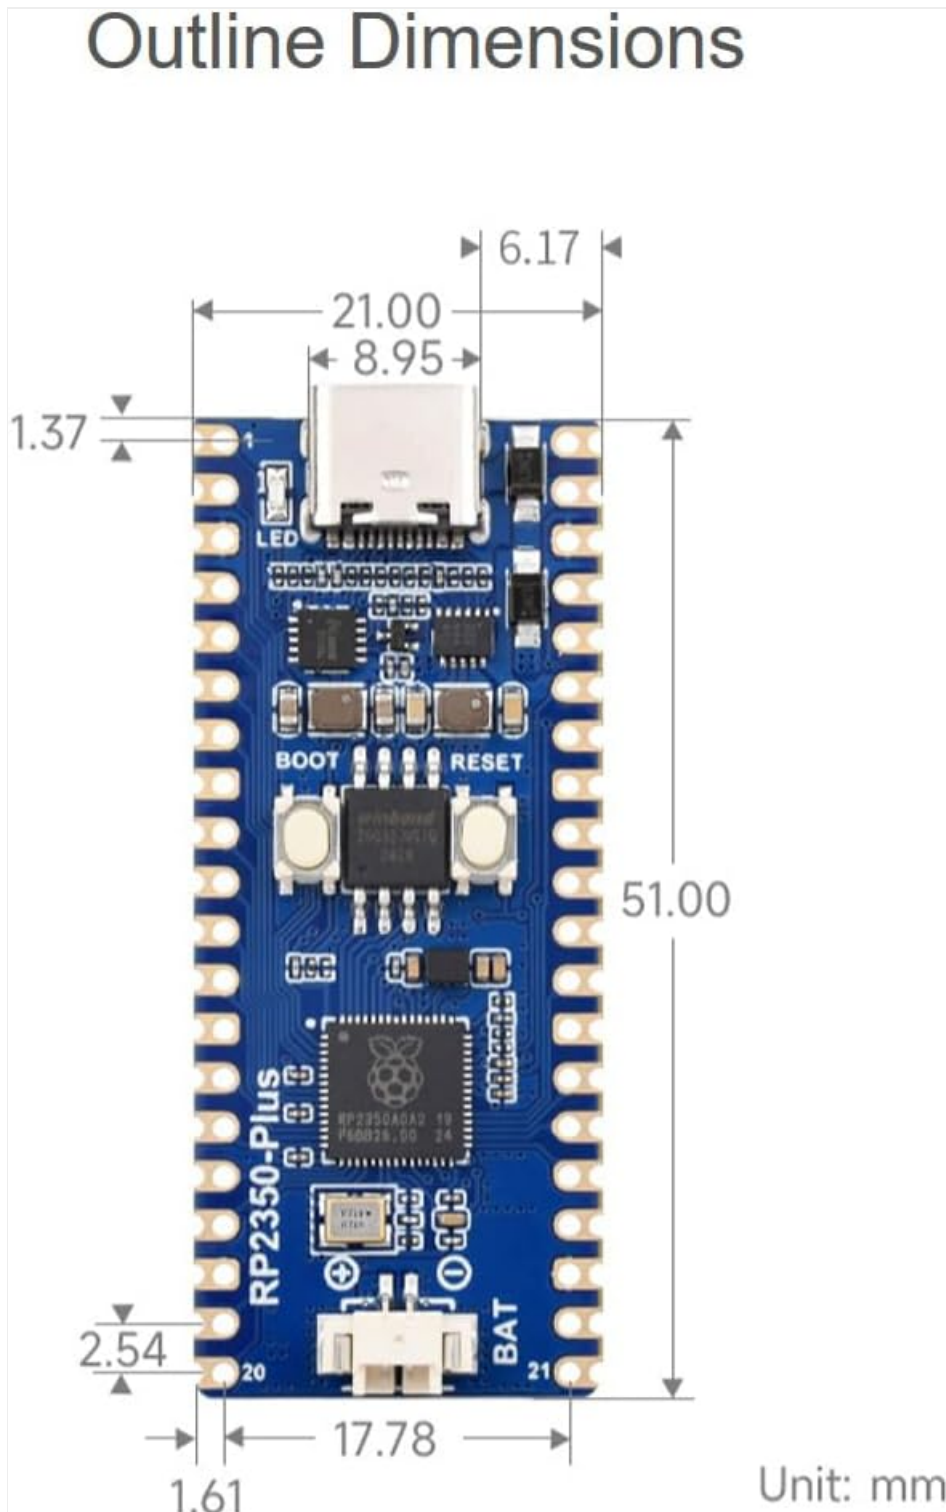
Technical drawing illustrating the precise dimensions of the RP2350 MCU Board Plus, with measurements provided in millimeters for accurate project planning and integration.
